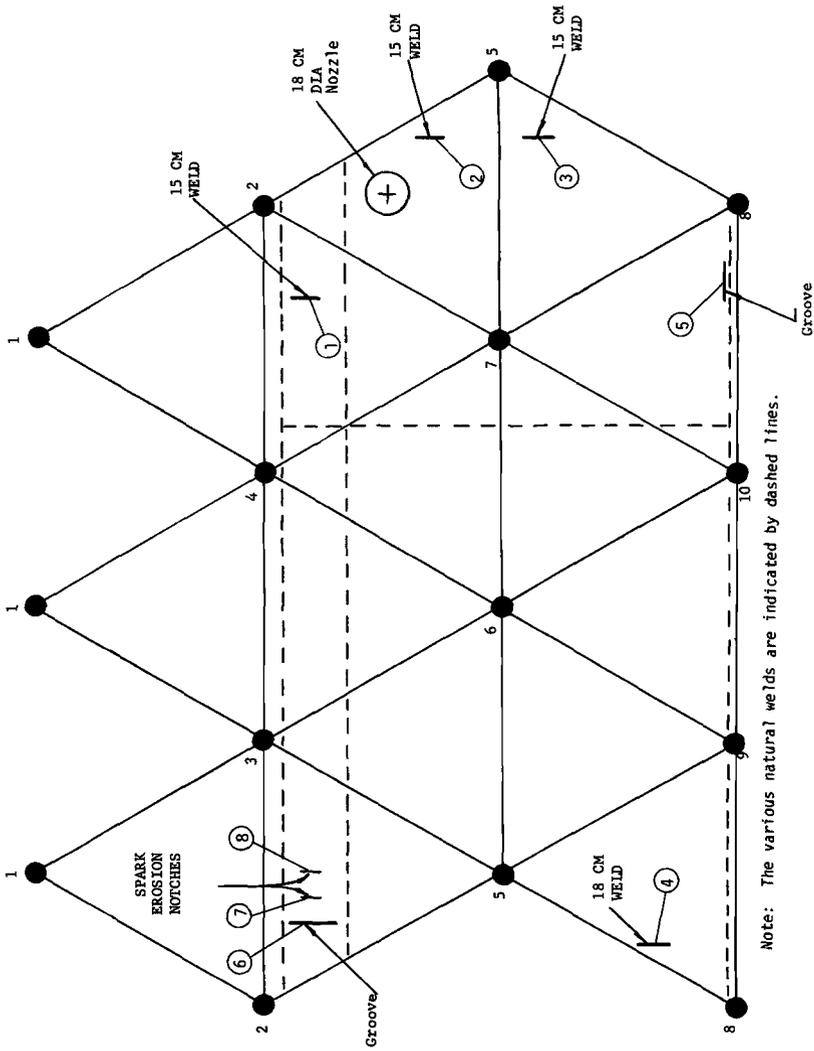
CRT presentation of cylindrical vessel with flaws, nozzle, and welds.
